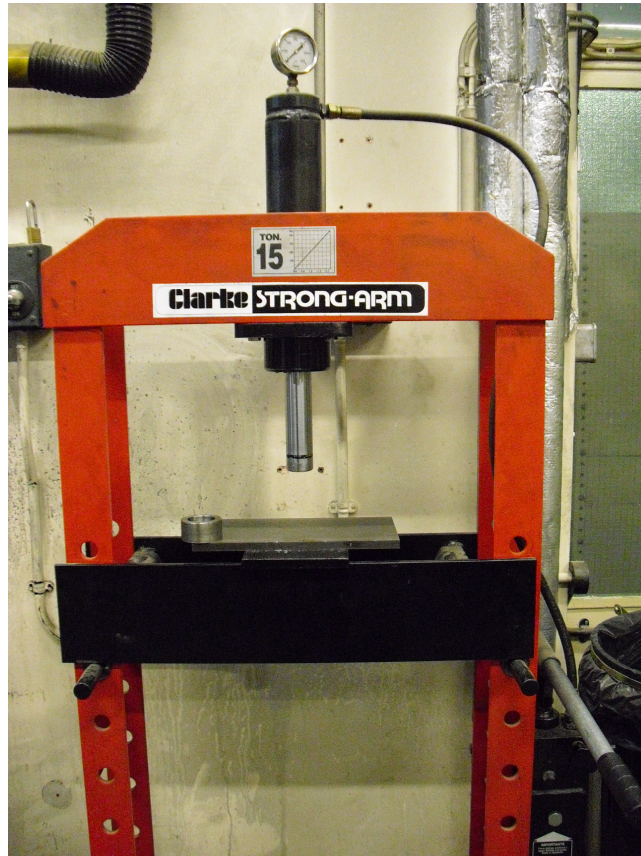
Hydraulic Press, used to cut dumbbell test pieces.
